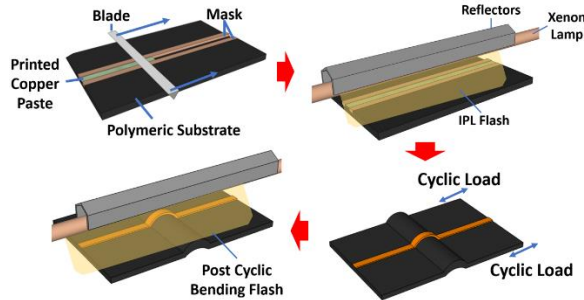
Schematic detailing the printing, IPL sintering, cyclic-bending, and healing flashing steps.
